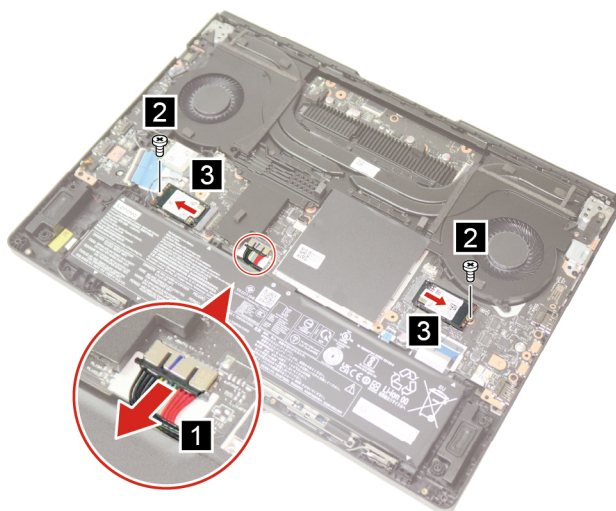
Disconnect the battery pack cable, remove two screws, and remove the 2242 solid-state drives
